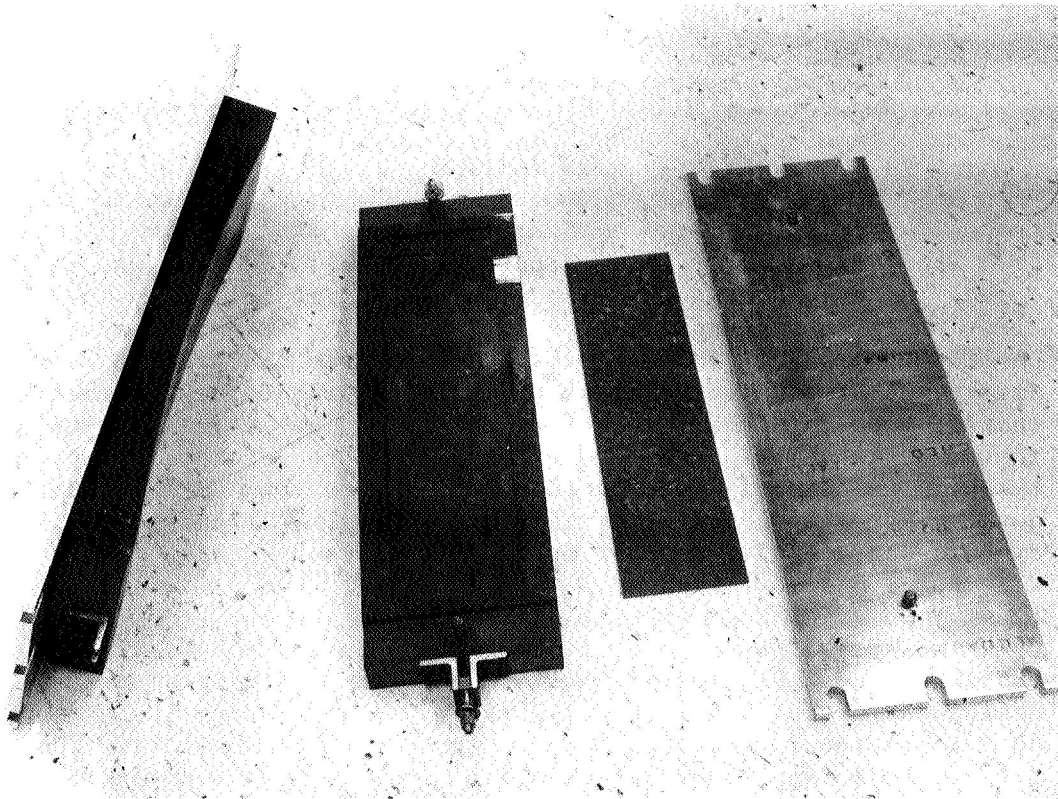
S-IVB Subsize Panel Forming Tool (Disassembled)
